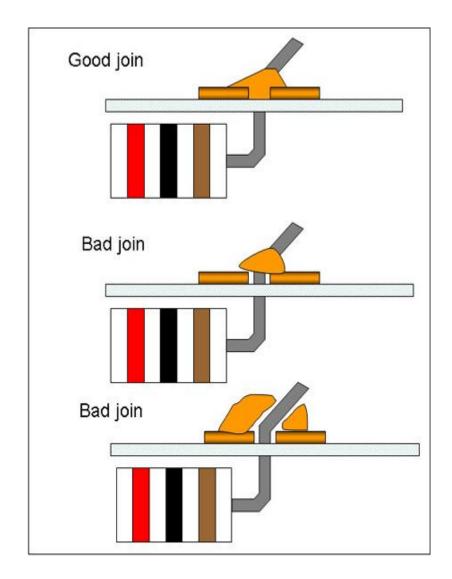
The solder in a good join will be shaped like a cone, with solid contact between the solder and all surfaces to be joined. Bad joins (also called dry joins) should be melted and remade.
